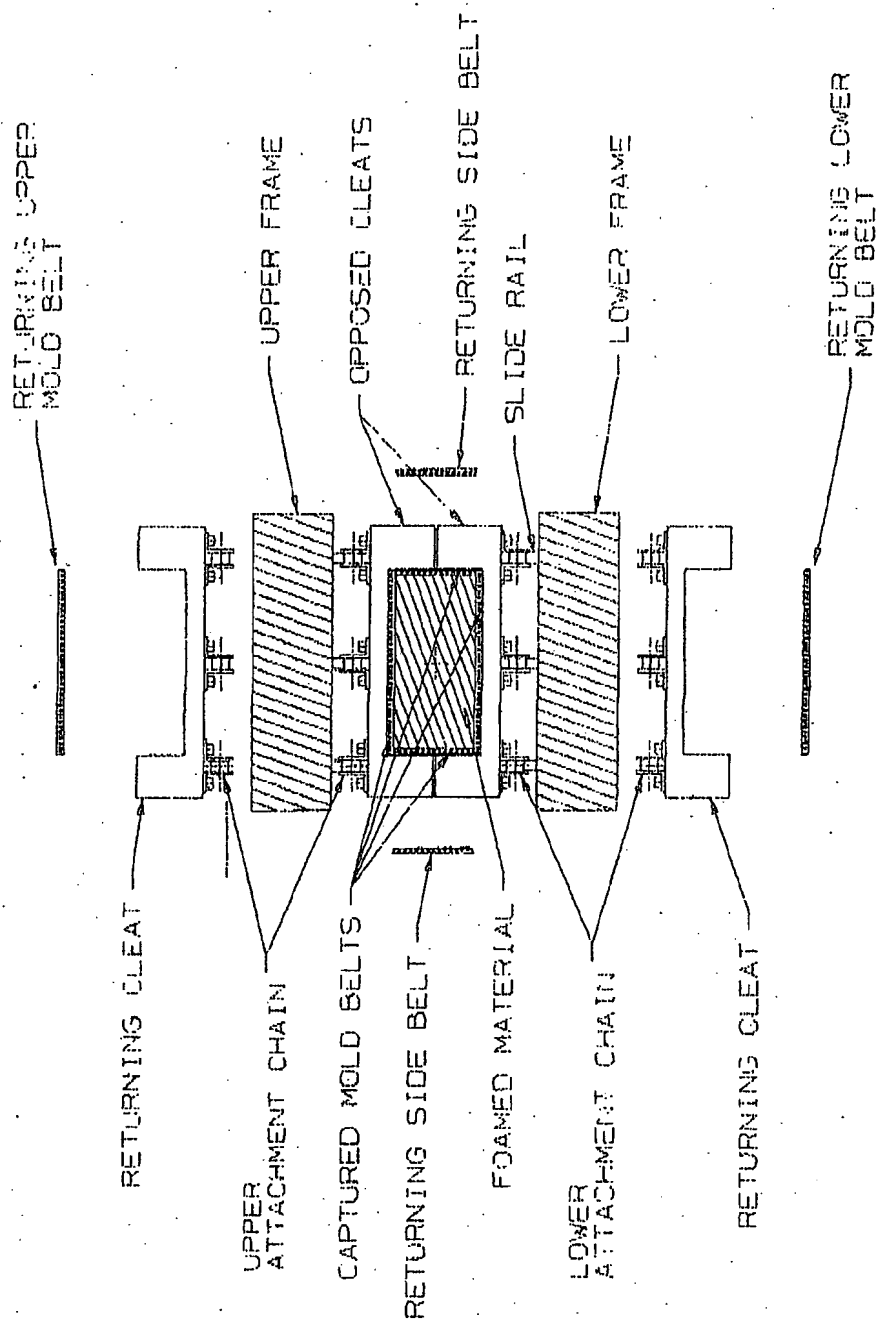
SECTION VIEW OF FORMING APPARATUS SHOWING FOUR CAPTURED MOLD BELTS WITHIN OPPOSED CLEATS.
